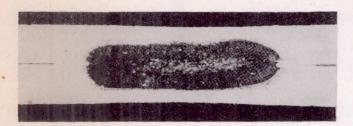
Spot welds from panels cleaned by wire brushing D.C. welds.
